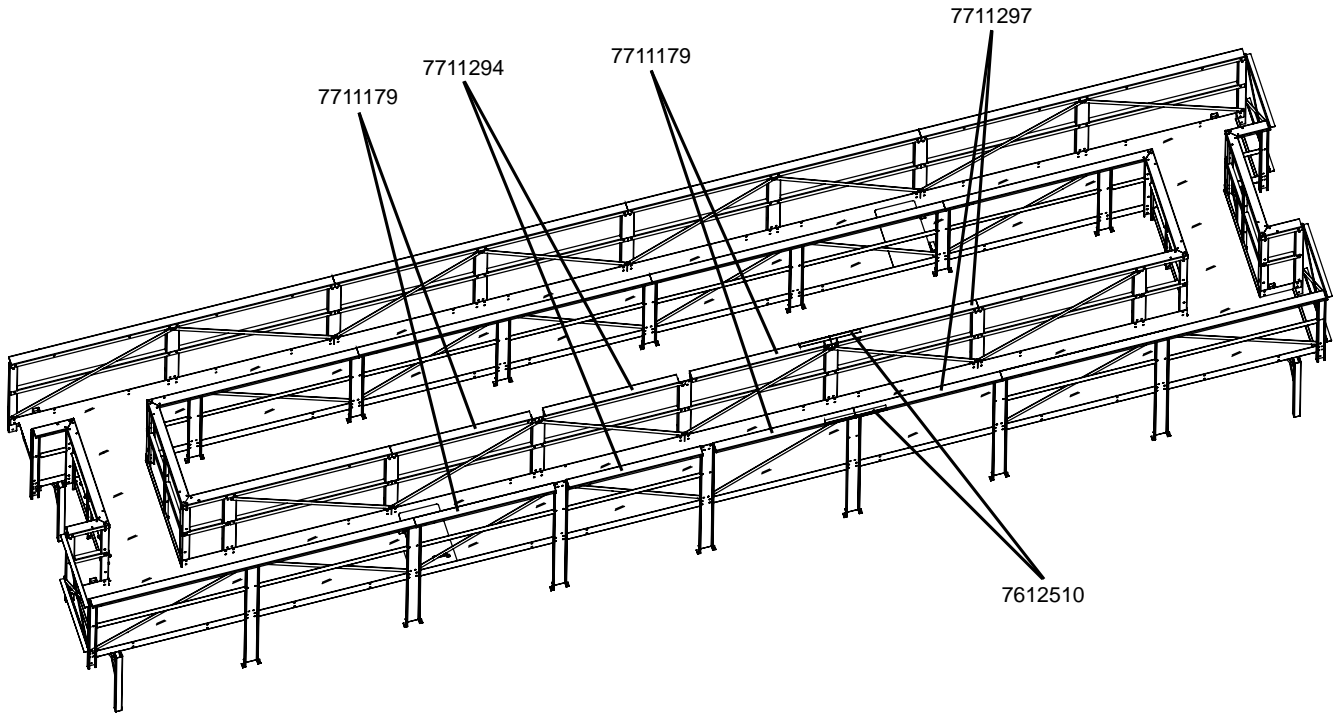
Installing the Connector Uprights and Handrail Junction Mounts
